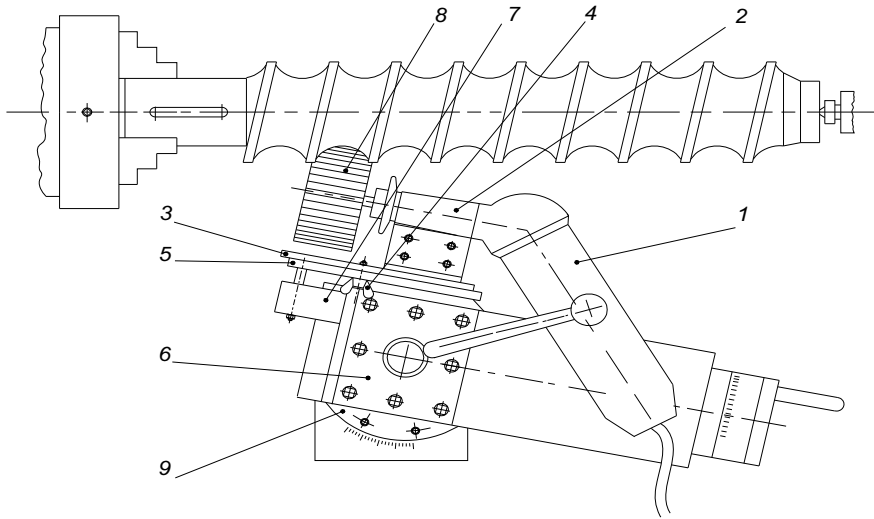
Device for polishing the surface of a helical groove placed on a cylindrical surface using rotating brushes with abrasive blades: (1) portable drilling machine; (2) bracelet device for clamping; (3) disc; (4) nuts; (5) fixed disc; (6) lathe tool holder; (7) parallelipedic-shaped part; (8) abrasive blade brush; (9) guide of the tool slide (Adapted from [17])
